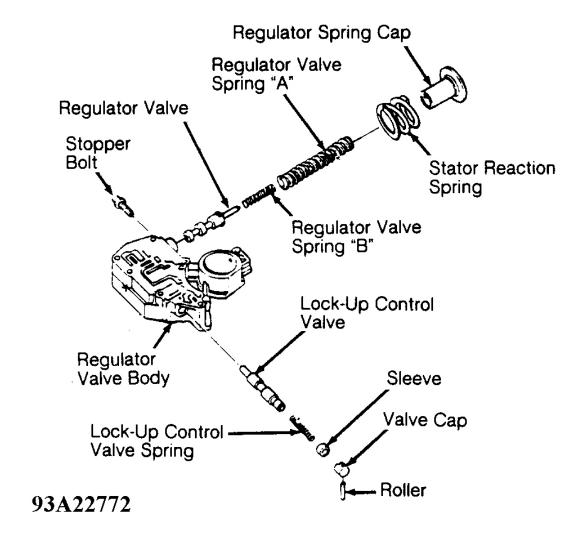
Exploded View Of Regulator Valve Body Courtesy of AMERICAN HONDA MOTOR CO., INC.
